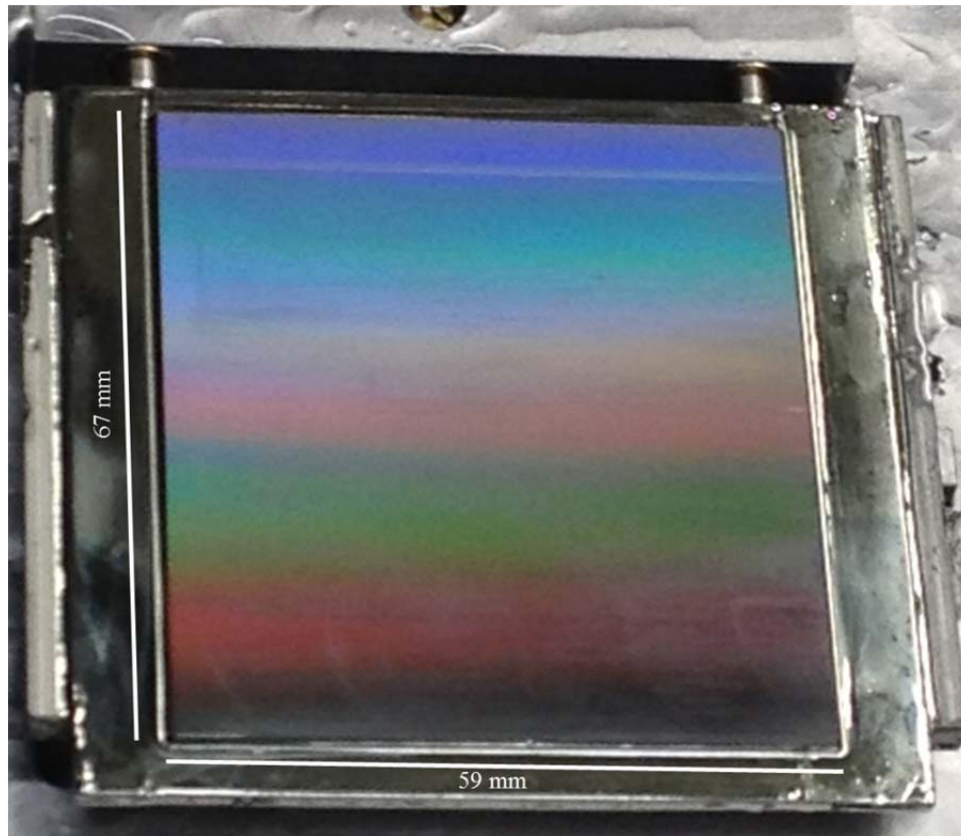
The 002u grating, just after completing the 28-day cut and in the fixture used to mount it to the PERL machine. The slight change in the diffracted light gradient near the top of the image corresponds to the chiller failure on day 24.
